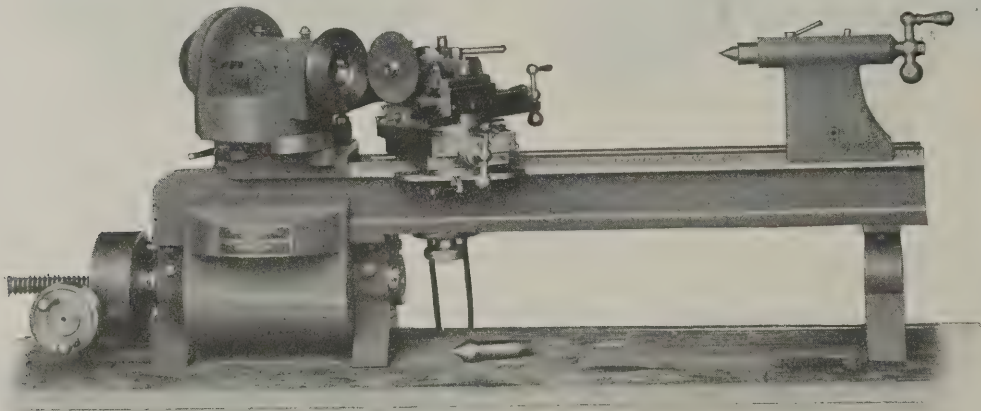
Swivel-head Lathe arranged for Face Grinding
